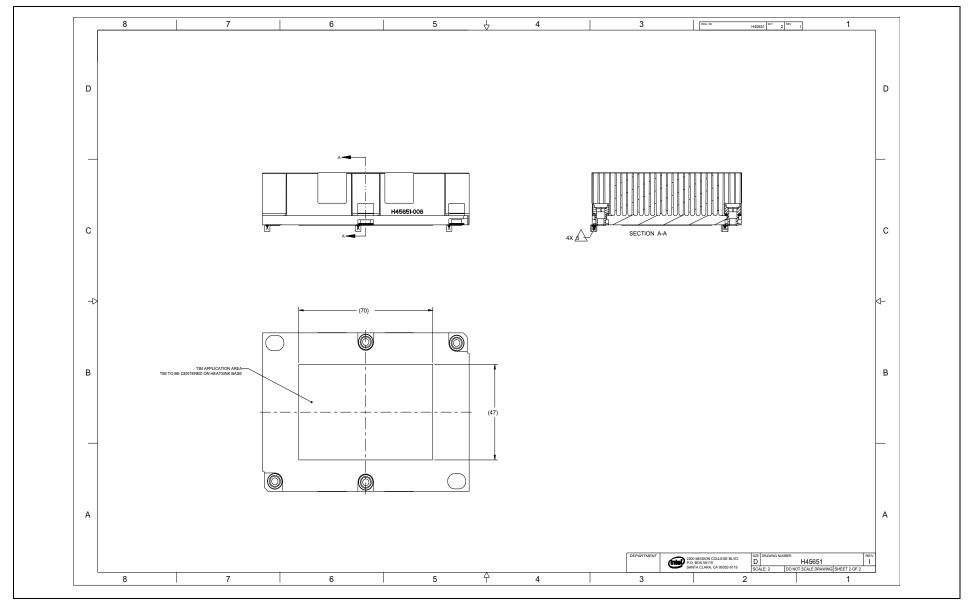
1U Extruded Heatsink (Sheet 1 of 2)
